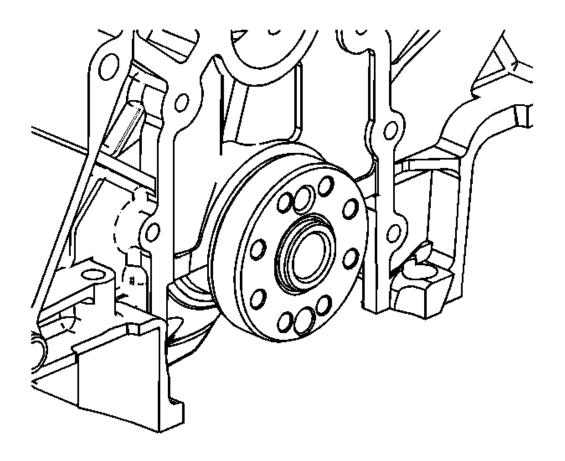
View Of Crankshaft Sealing Surface Courtesy of GENERAL MOTORS CORP.
